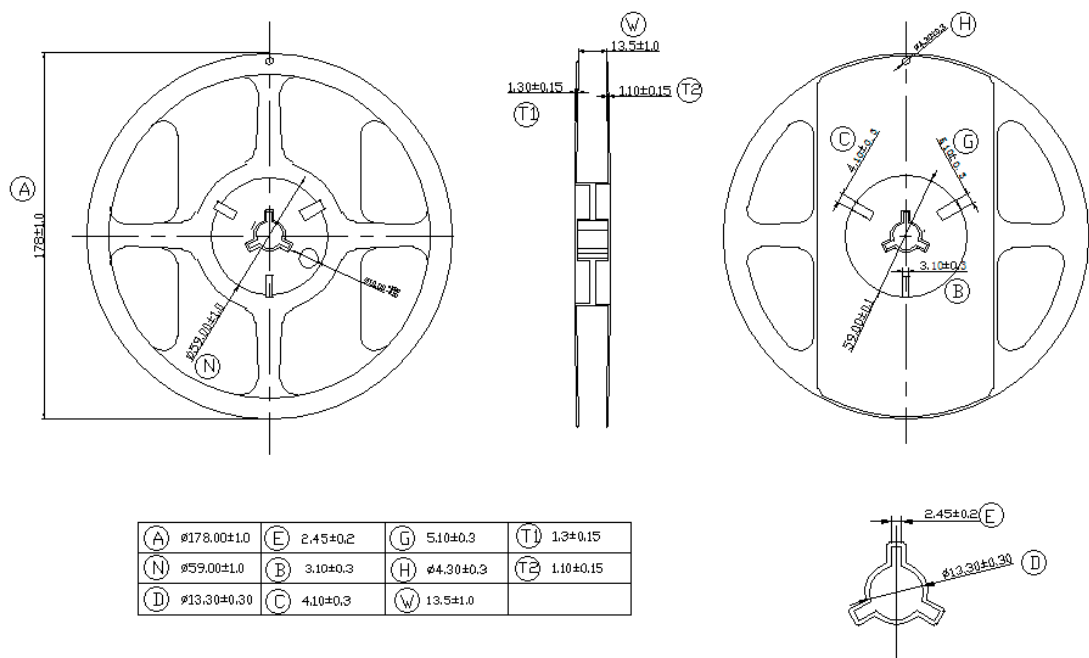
Reel dimensions for LUXEON MultiColor Module 2.5W.
